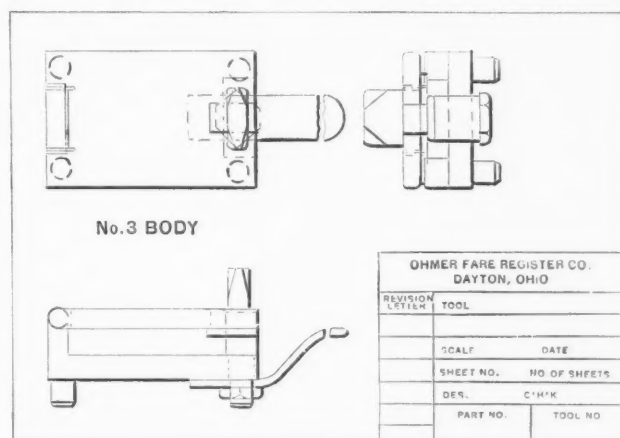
Standard-Part Drawing on Which Details can be Added to Suit Individual Jobs
